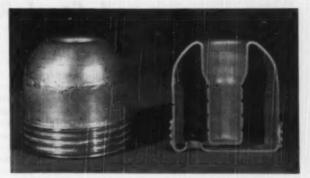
Cutaway View of the Upper Half of an Igniter Head — That Part Above the Weld Including the Cylindrical Portion Extending Down Into the Lower Shell. This was made by the Martin Marform process in five operations, instead of the nine required by more conventional methods
